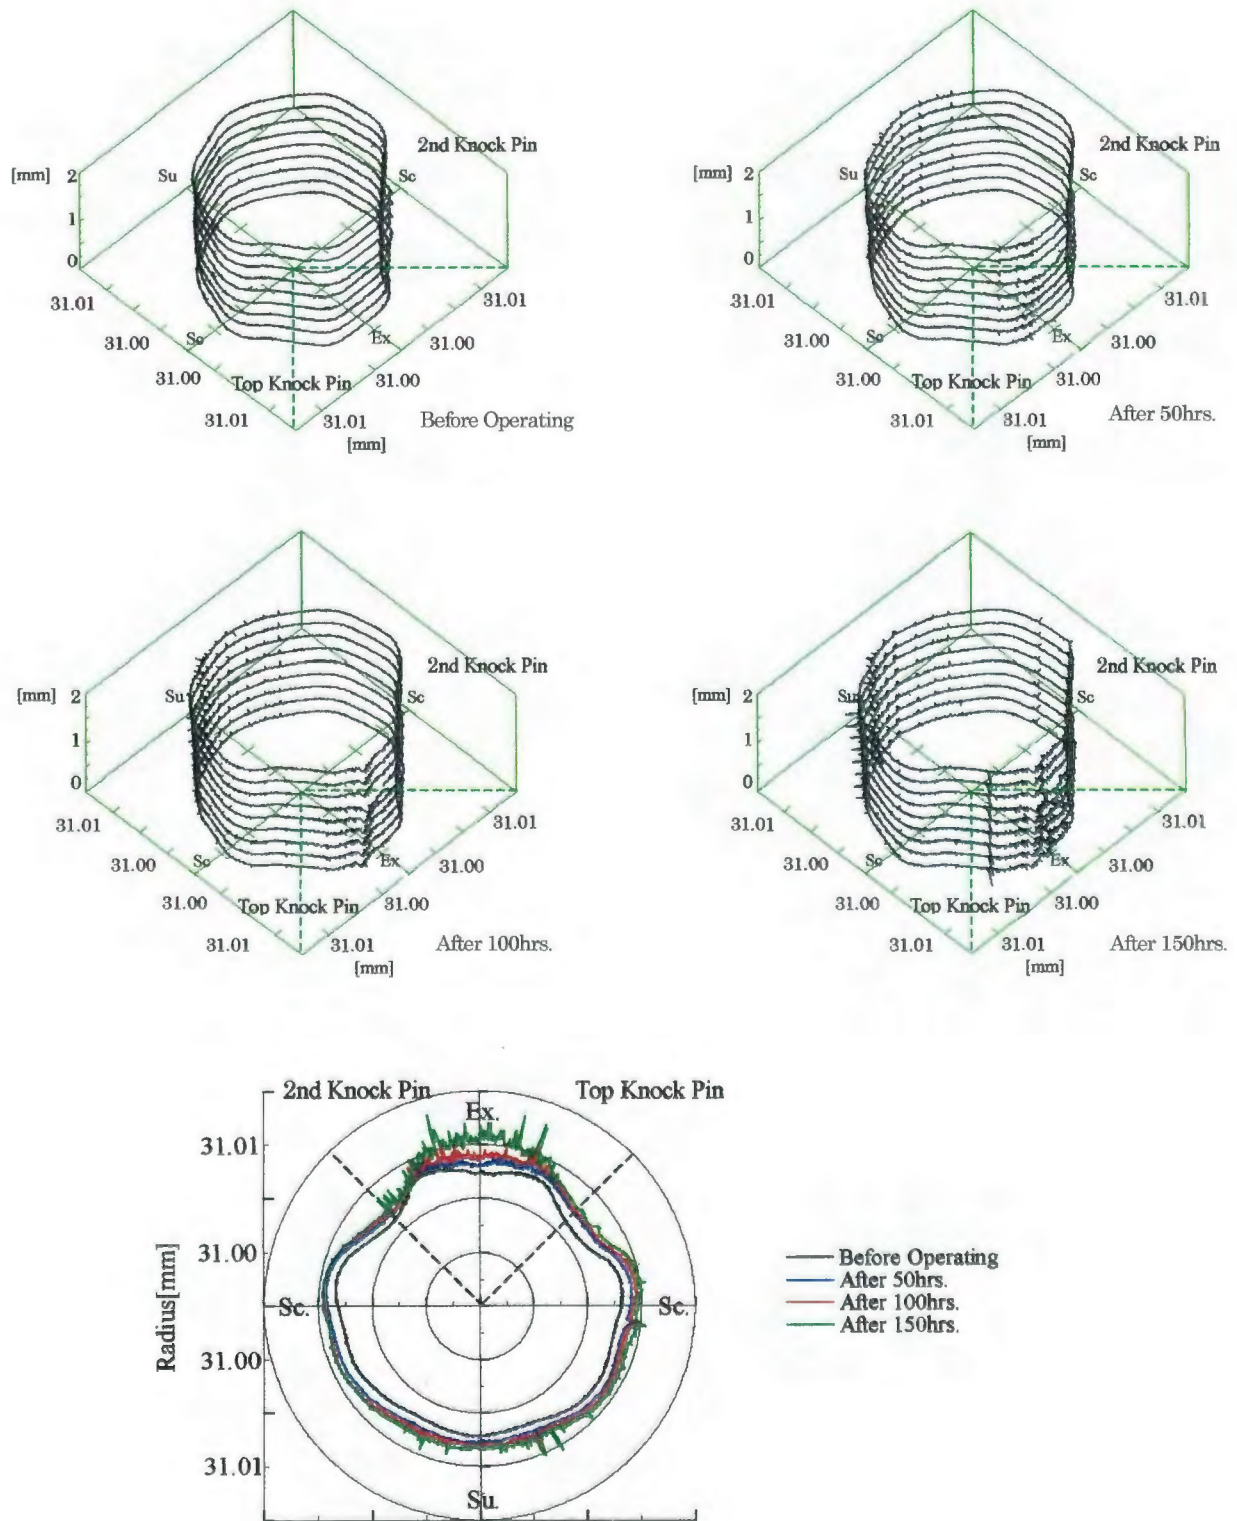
(d) The three dimensional and plane form of cylinder M1(RND4)
